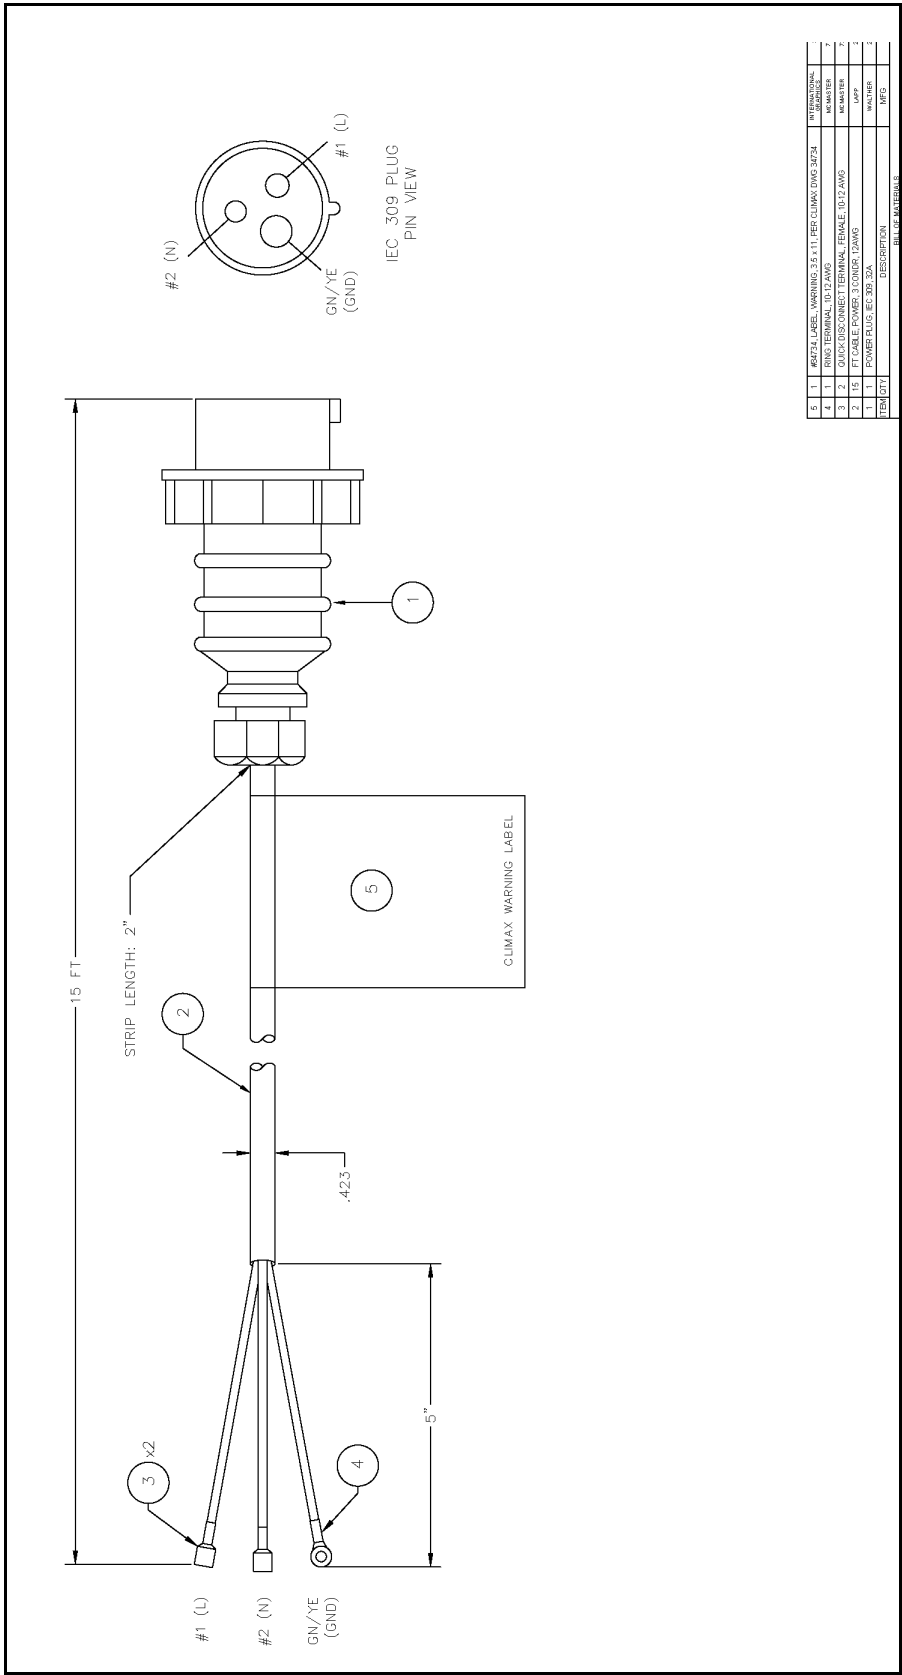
BB5000 EIBENSTOCK POWER CABLE ASSEMBLY 2ND GEN 120V CE 332P4W PIN/SLEEVE PLUG (P/N 88653 E00173)
